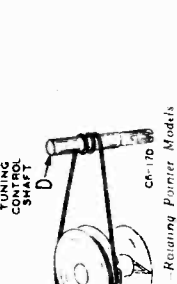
Replacing Drive Cord—Rotating Pointer Models
